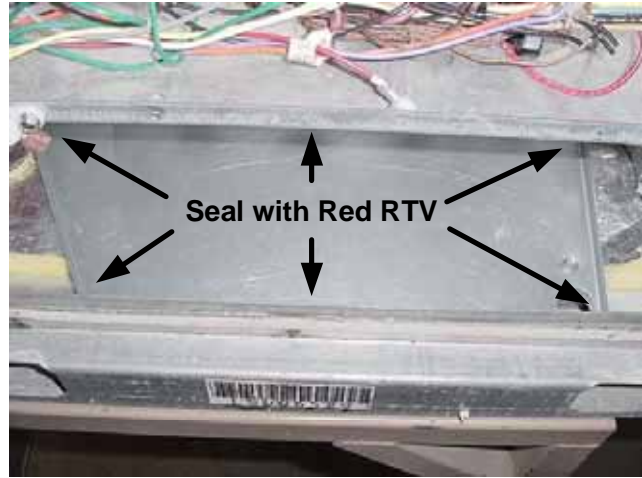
EDGES OF CORNER TO BE SEALED
